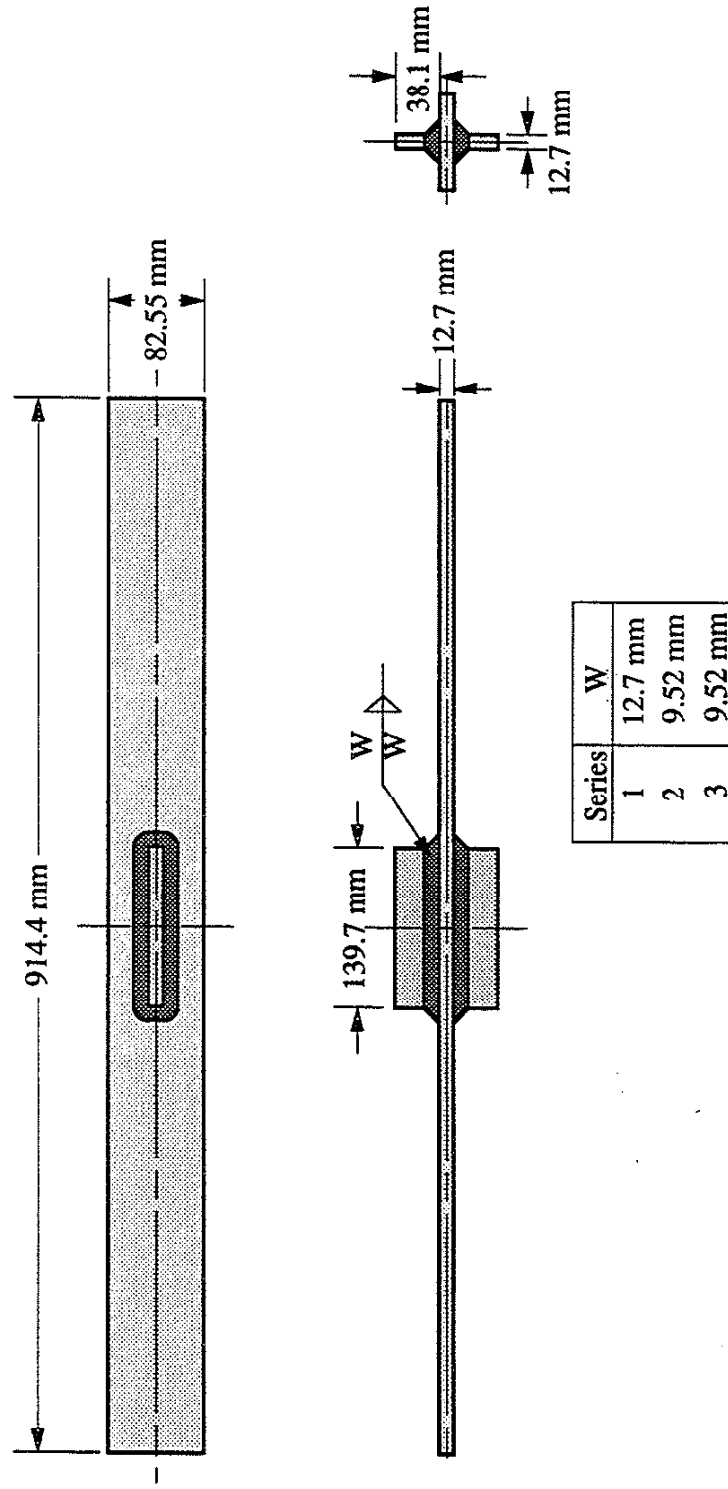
The specimen dimensions for the longitudinal attachment. The weld leg length (W) for the three series of specimens fabricated is listed.
